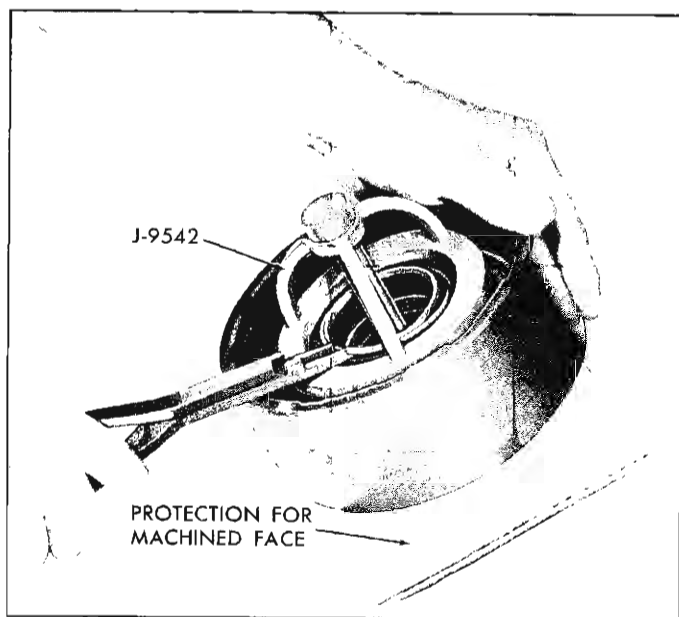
Removing Clutch Spring Retainer Snap Ring
